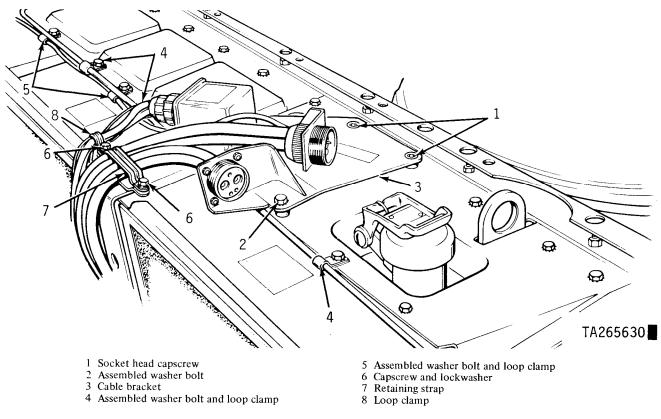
Removing or installing left wiring harness cable bracket, model AVDS-1790-2C and AVDS-I 790-2D late engines.
